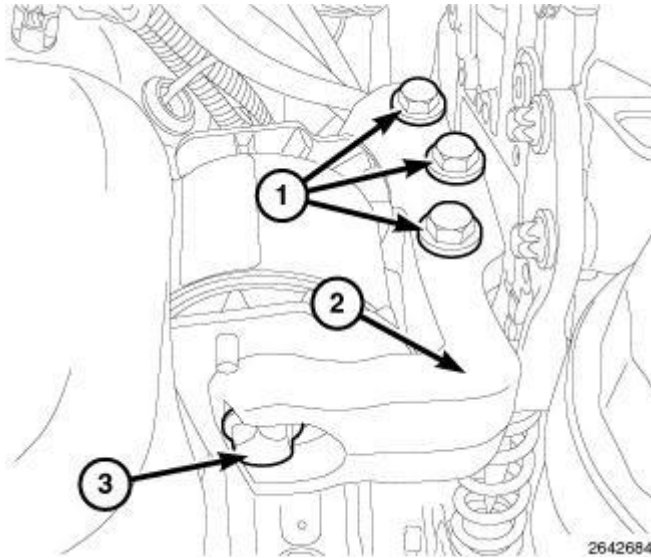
Engine Mount Carrier Bracket & Gasket
